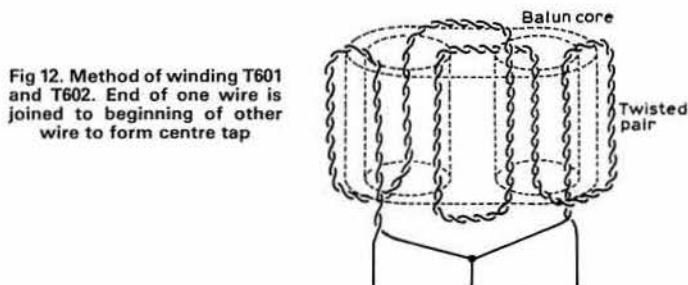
Method of winding T601 and T602. End of one wire is joined to beginning of other wire to form centre tap
